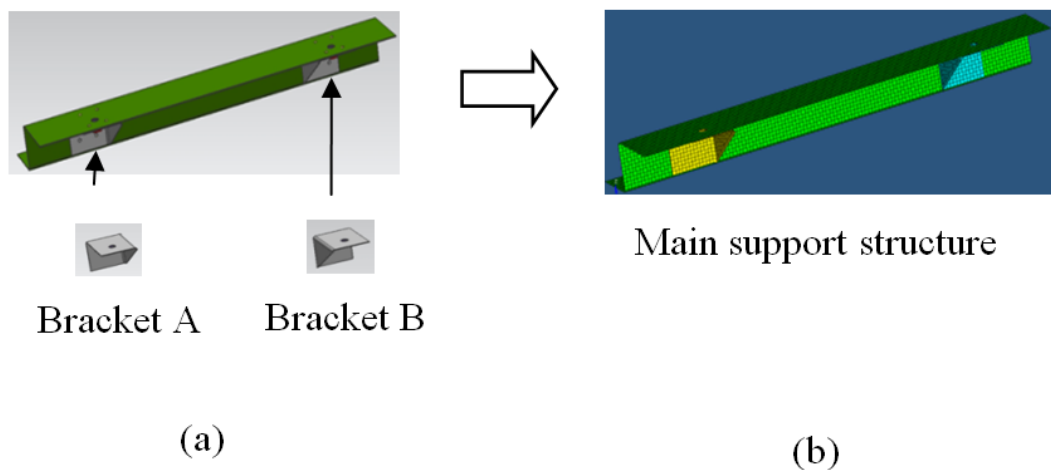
Assembly process of main support structure (welded structures)
